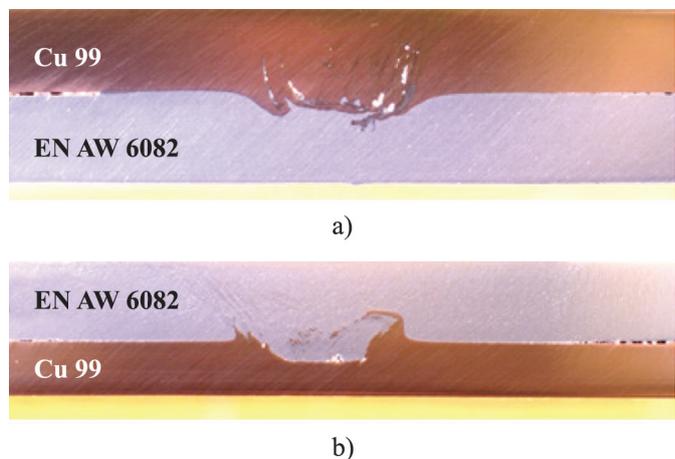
Macroscopic analyze of FSW weld Cu 99-EN AW 6082: a) Cu99 placed above; b) EN AW 6082 placed above.
